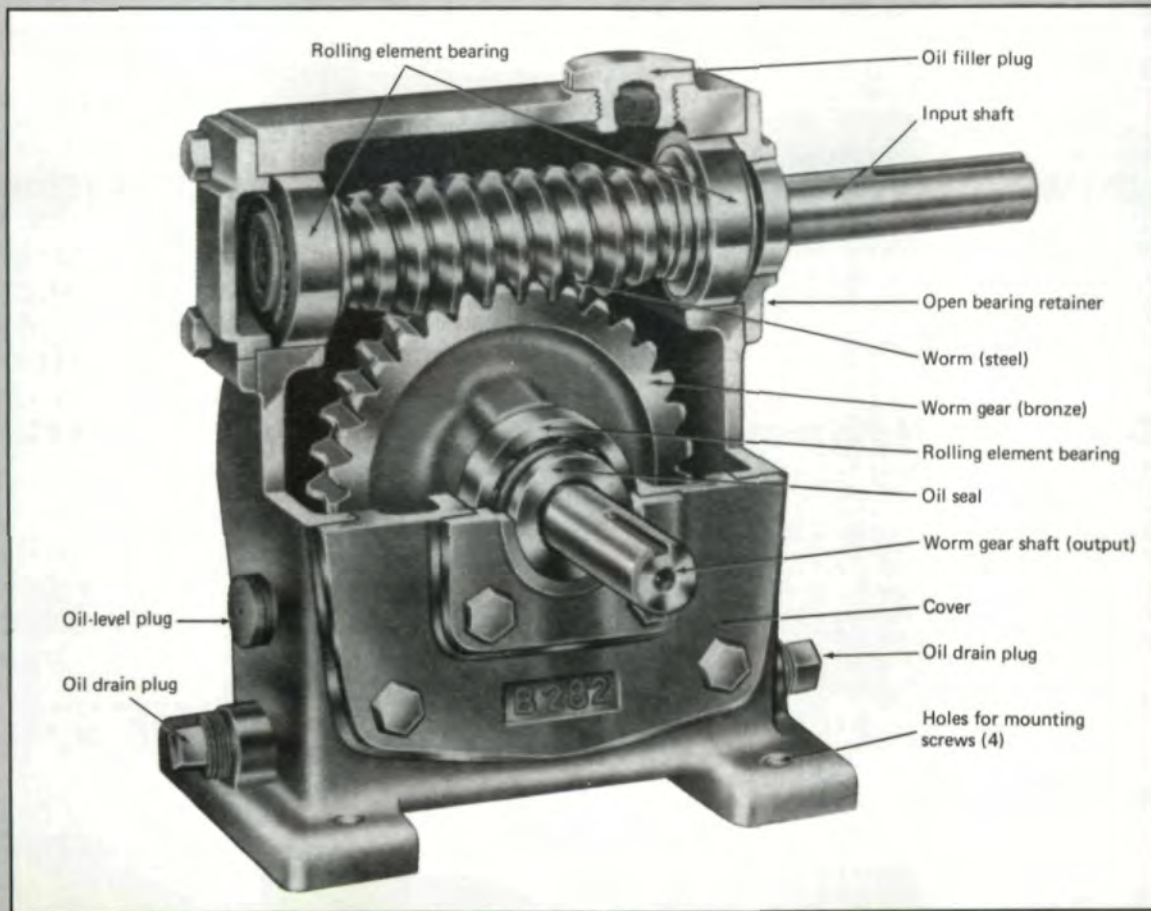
Typical medium-size worm gear speed reducer. (Courtesy of Morse Industrial Corp., subsidiary of Emerson Electric Co.)
